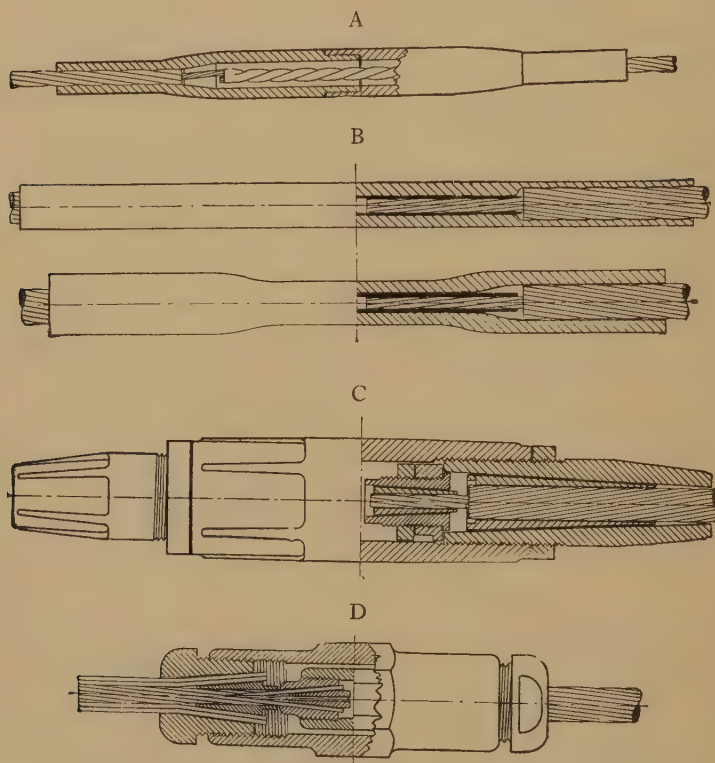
Four types of joint for composite cable. (A) American torsion-compression. (B) Hedderheimer compression joint. (C) A.E.G. conical seat joint. (D) Pairard joint.
